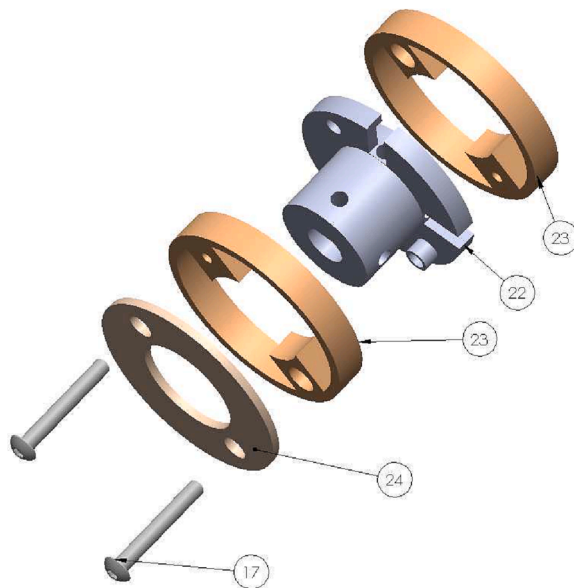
Slip ring assembly. The bottom slip ring small screw hole must be aligned with the top slip ring big screw hole. .
